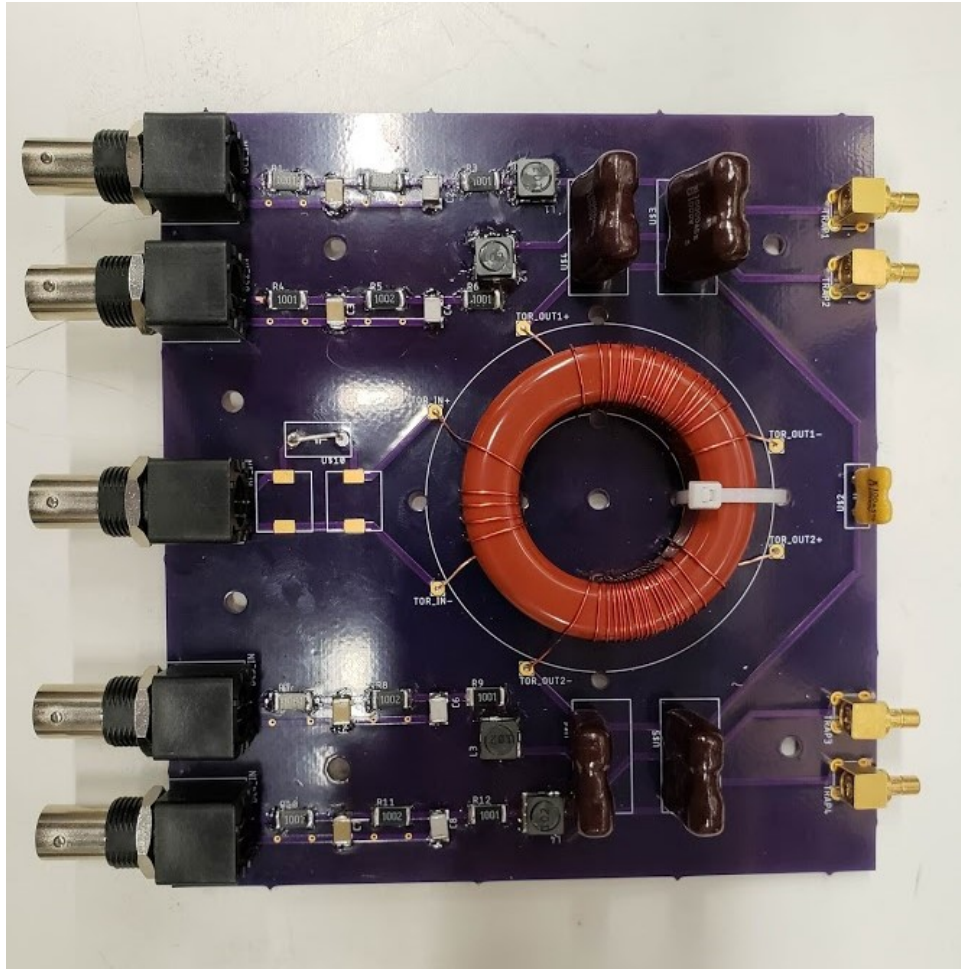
Picture of the assembled and soldered Enterprise trap drive unit.
